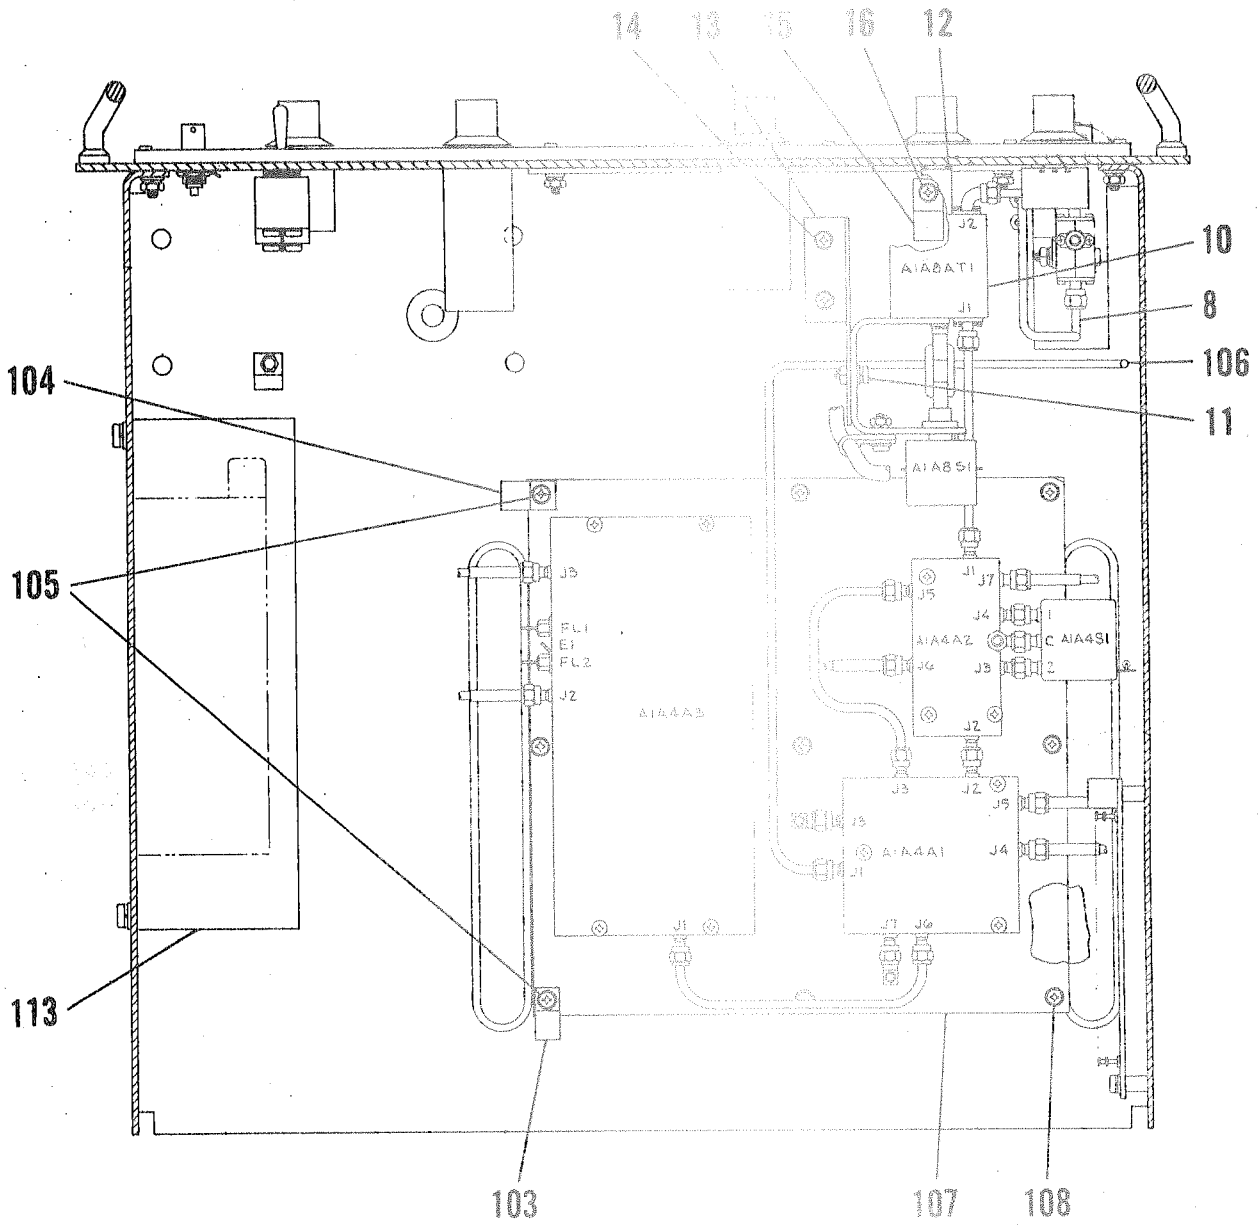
Test Set, Electronics Assembly (Sheet 4 of 6)
